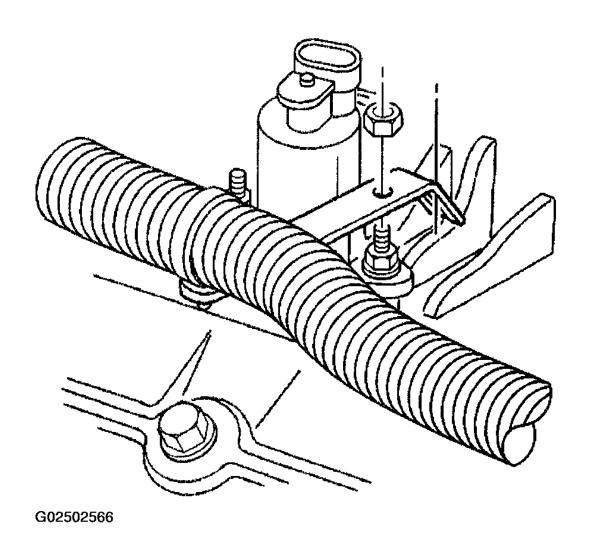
Installing Engine Harness Bracket To EVAP Canister Purge Solenoid Valve Stud Courtesy of GENERAL MOTORS CORP.
